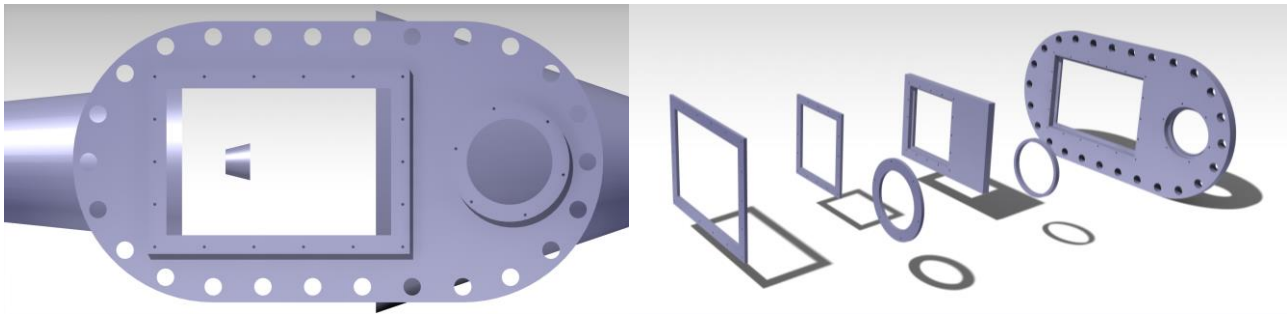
View of the test chamber from the large window (left) and exploded view of the flange window assembly
